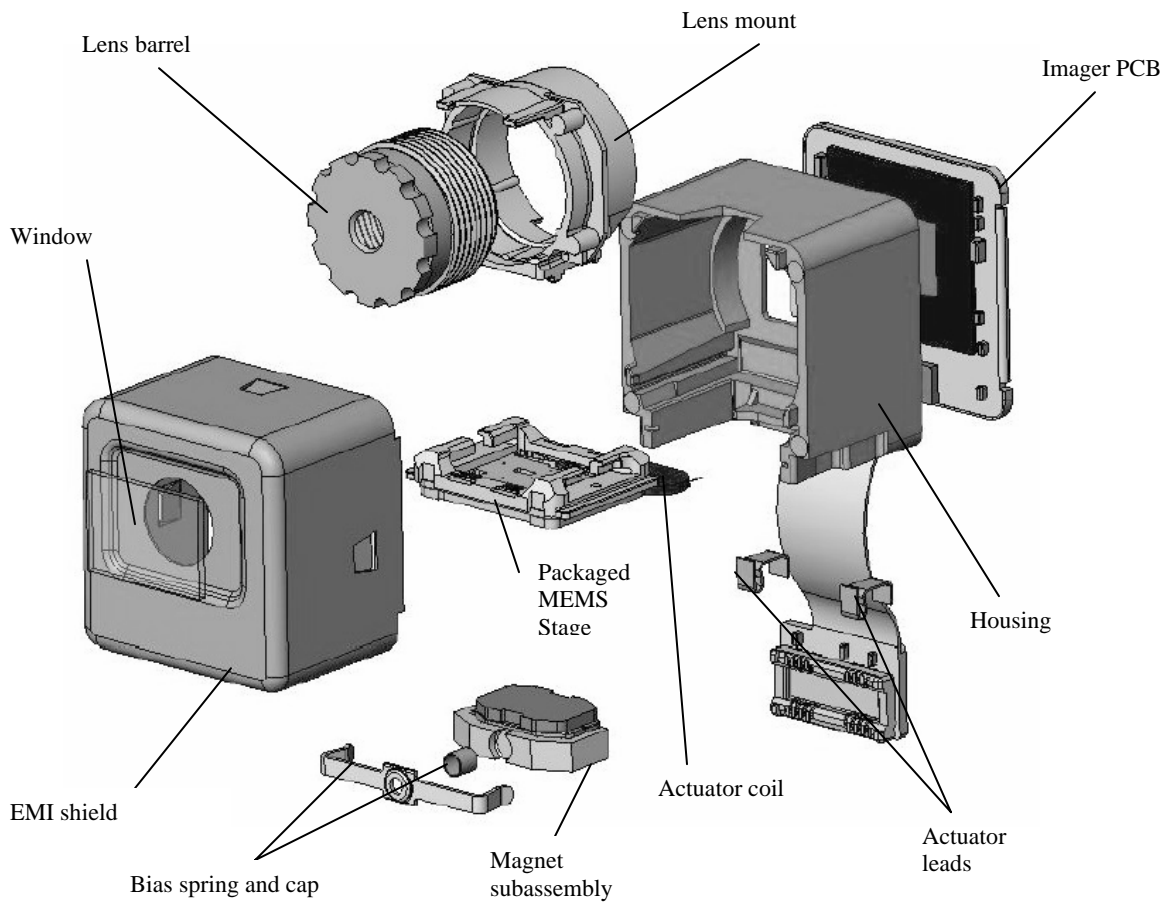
Exploded view of a MEMS digital camera shows all components used in the assembly.
